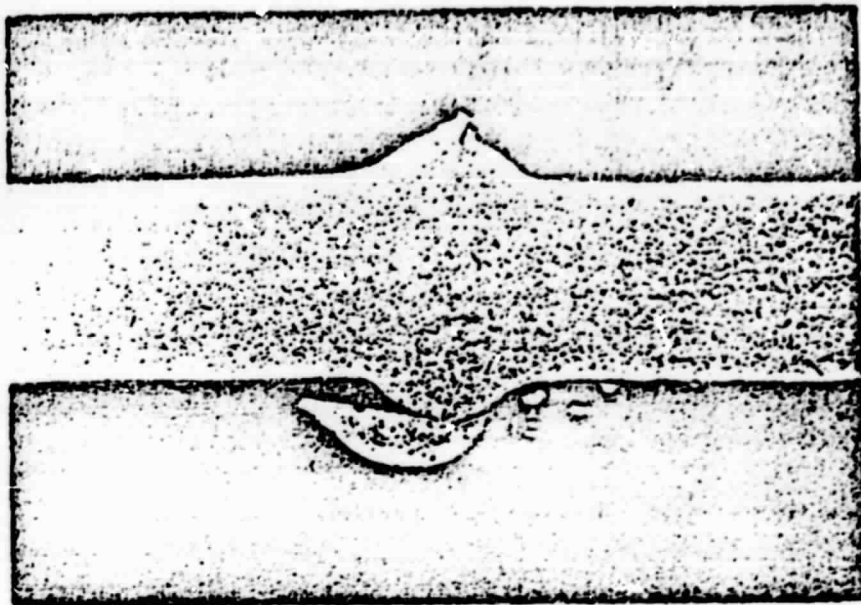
Cross-section of 2-in. ASTM A106B steel pipe weld. Flash is on inner diameter. X6.25
